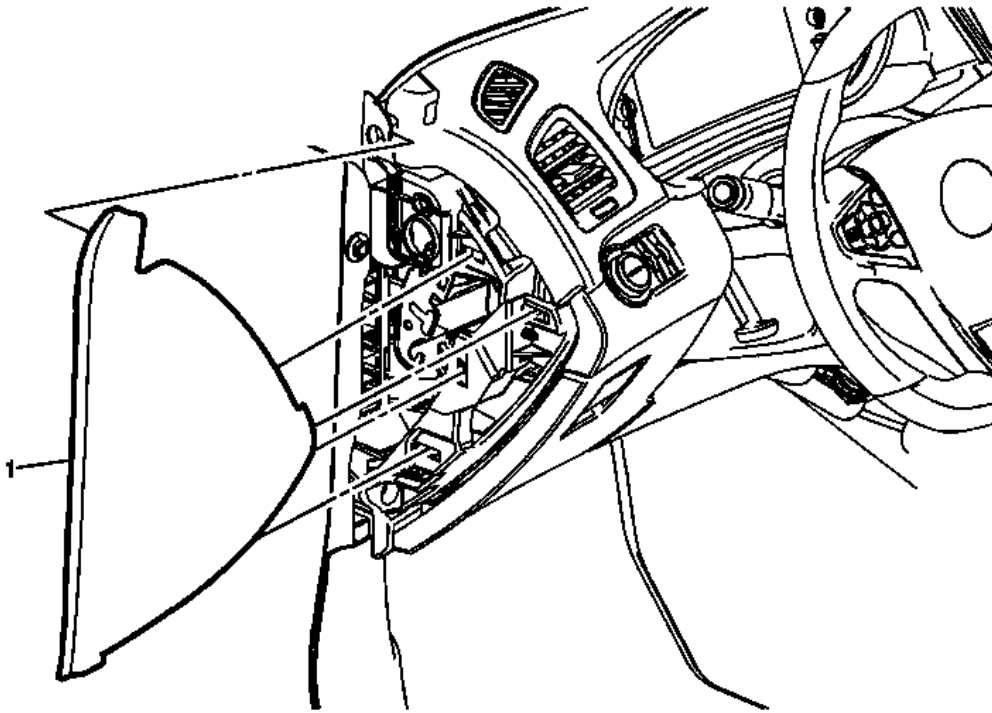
Instrument Panel Outer Trim Cover - Left Side
